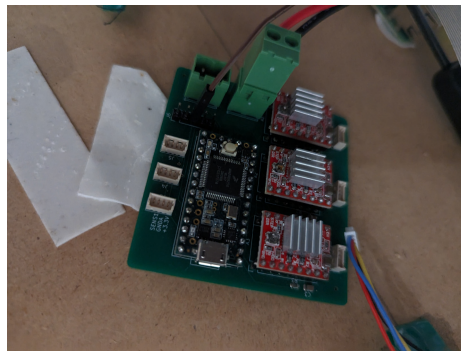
The custom PCB with the Teensy, stepper drivers and connector interface.
